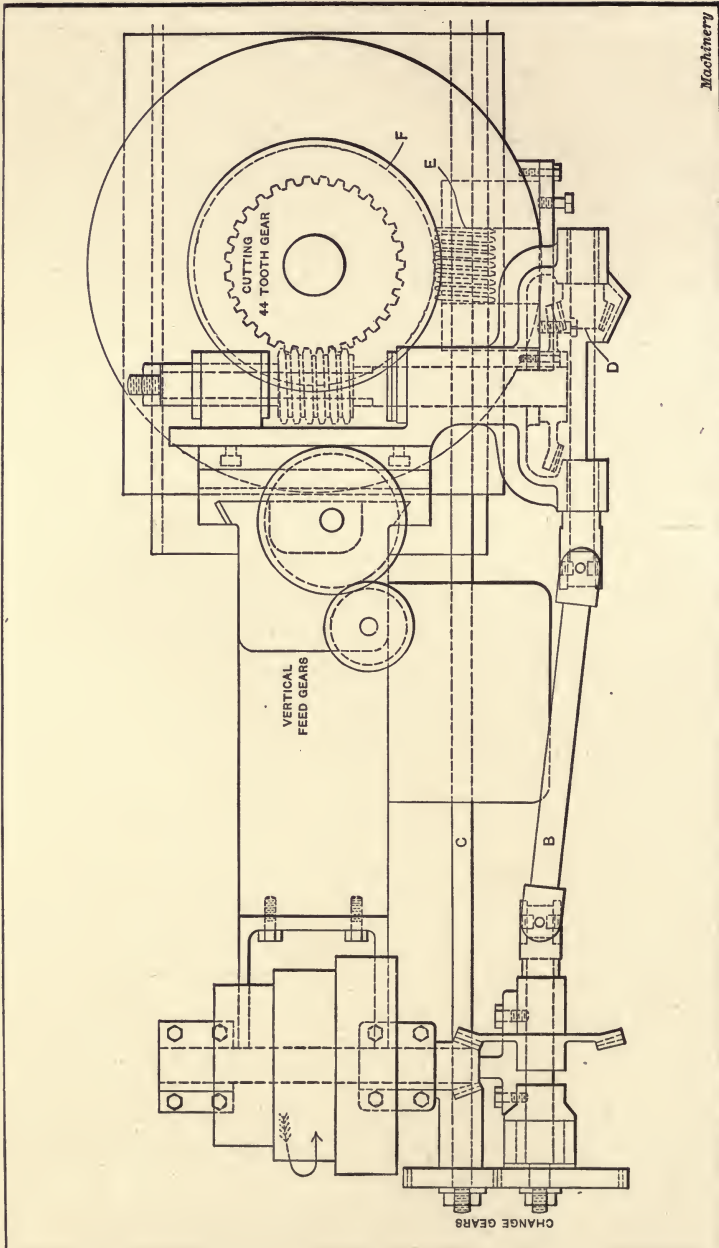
Hob and Table Driving Arrangement of a No. 3 Farwell Gear Hobbing Machine
